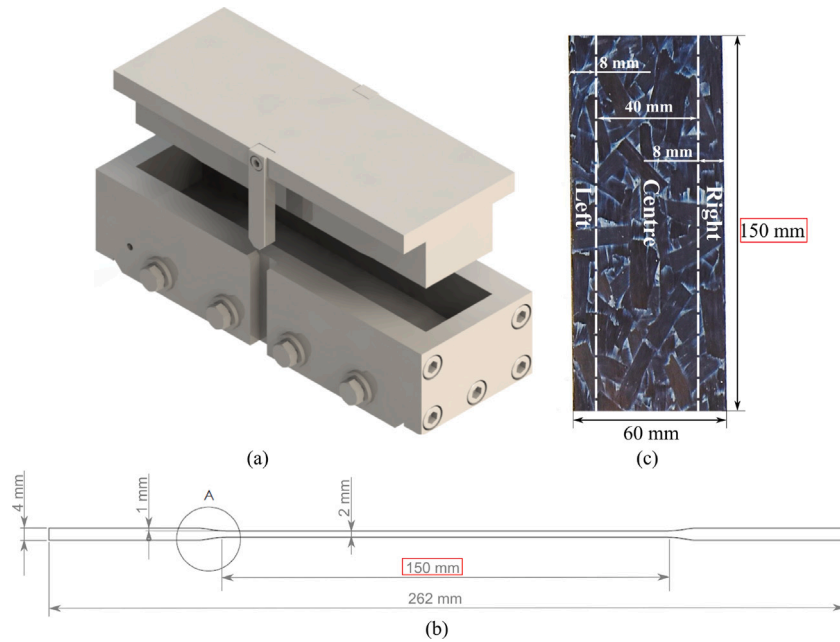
(a) The net-shaped mould (b) cross-section of the mould cavity (c) representation and dimensions of gauge area in specimen.
